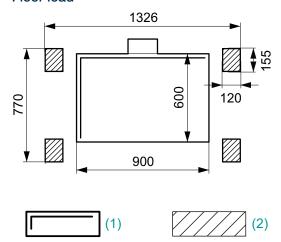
Floor load of DFZL-1000, platform height 200 mm
